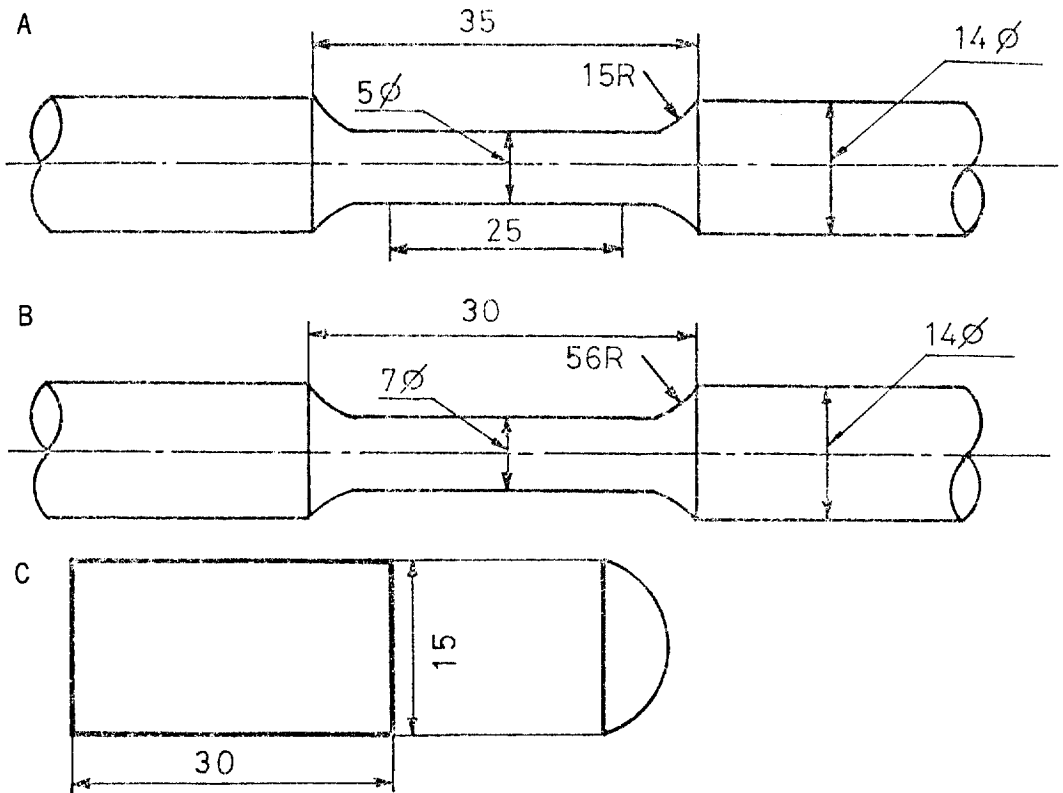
Specimen of mechanical test. (A) tensile test (B) rotary bending fatigue test (C) wear test
